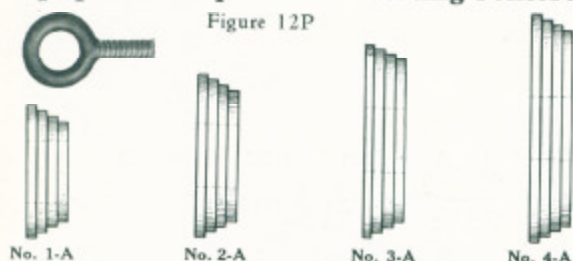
P shows four step rings left rough turned for machining to size to fit the inside diameter of the skirt of Piston on which they will be used.
